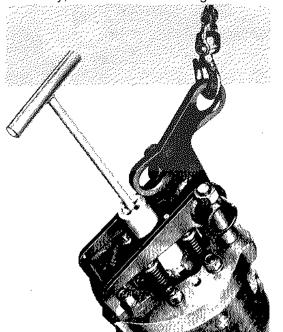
Power Assembly Removal With Lifting Clamp And Hoist 76E1179
